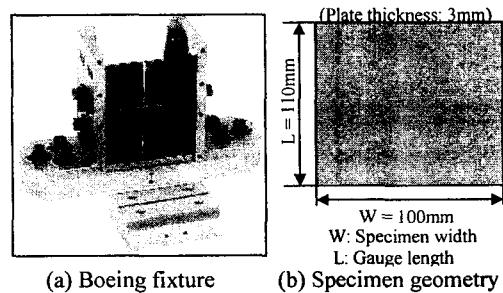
(a) Boeing fixture and (b) specimen geometry for CAI strength test
